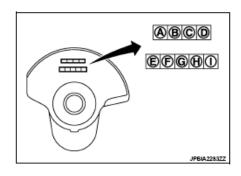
Identifying Crankshaft Pin Journal Diameter Grade Number Courtesy of NISSAN MOTOR CO., U.S.A.
